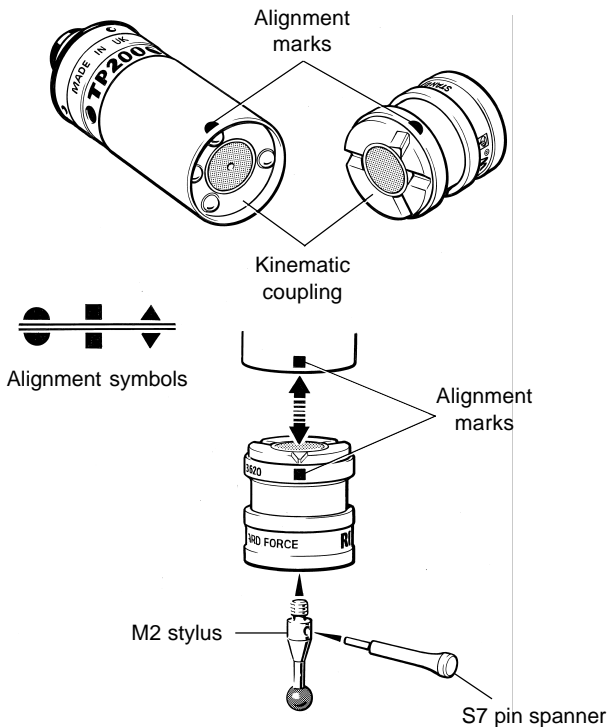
Assembling the TP200 probe sensor to a M8 probe head
